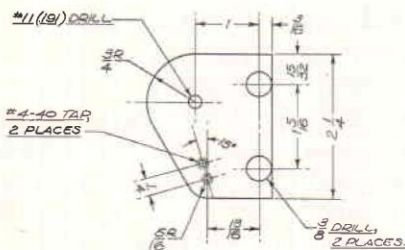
Drawing of the mounting plate for the Lift Assist Unit and bolt case. It can be used for either the left or right side.
